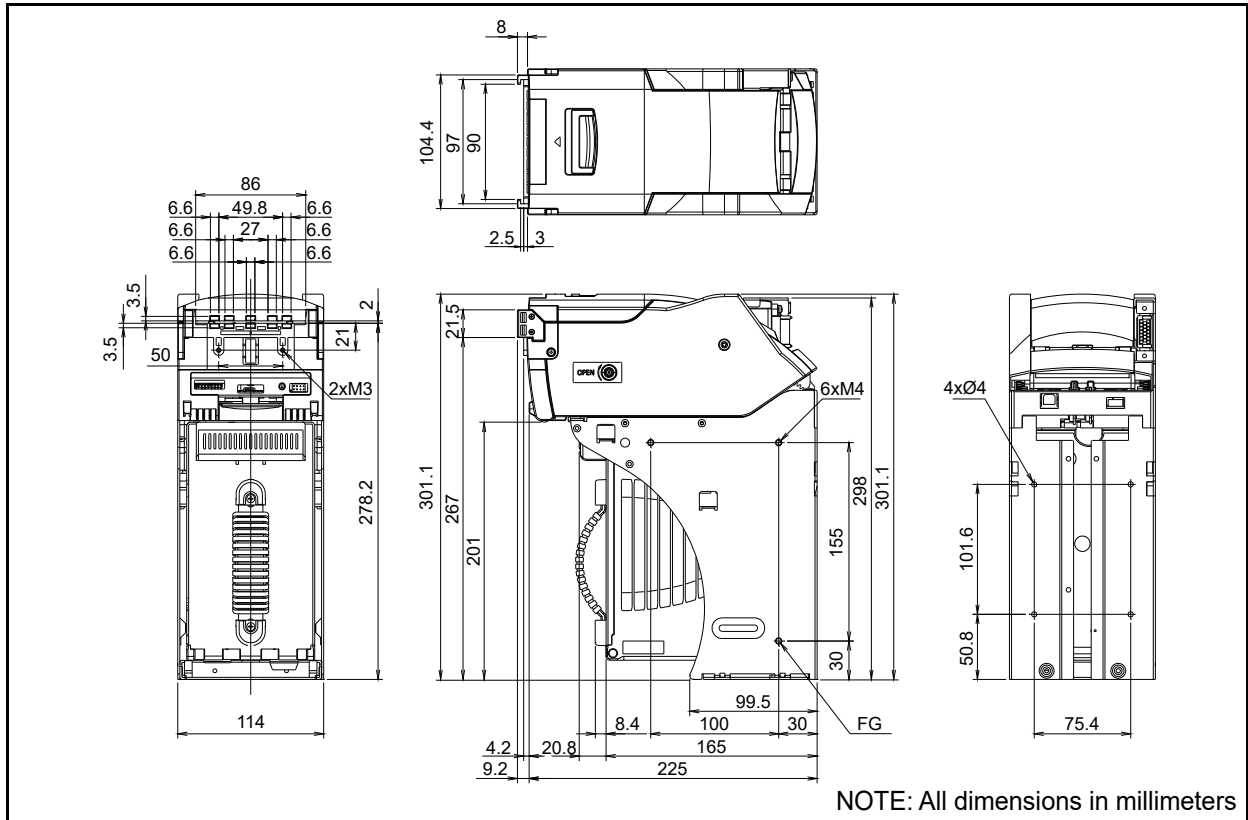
UBA Pro Unit With ICB 500 Note Cash Box Outside Dimension
